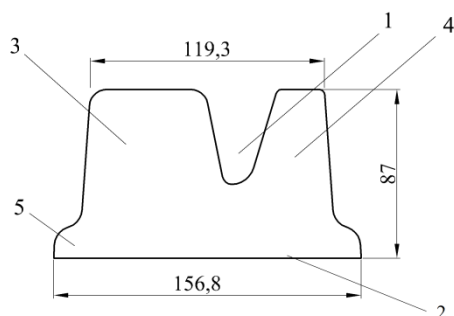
Cross section of TRNT-58 breakdown bar, being formed in rough-edged slitting pass No5. 1- groove; 2 — bottom; 3 — head; 4 — bearing rib (rubies); 5 - flanges
